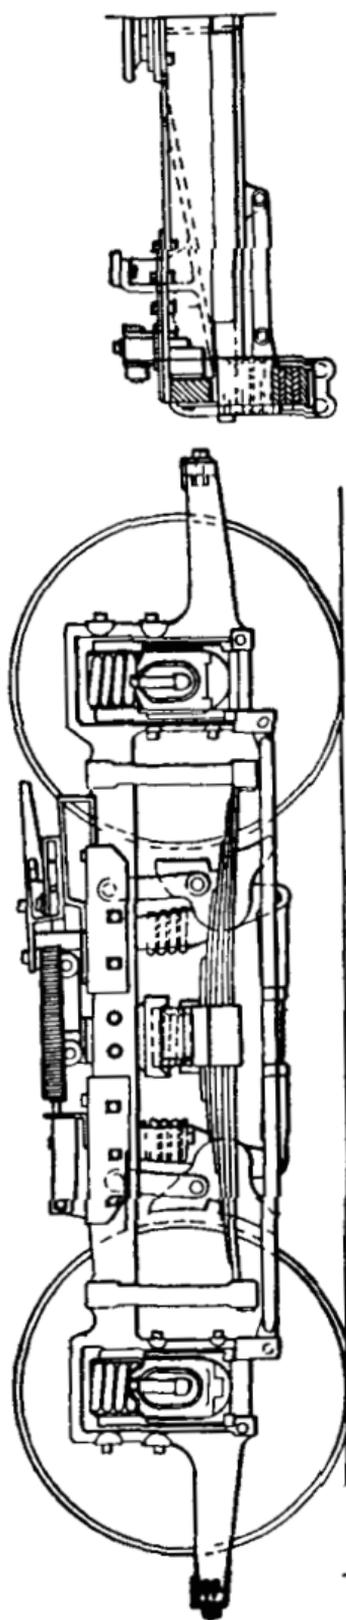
Swivel truck with forged steel side frames and longitudinal half-elliptic springs carried in swinging links
